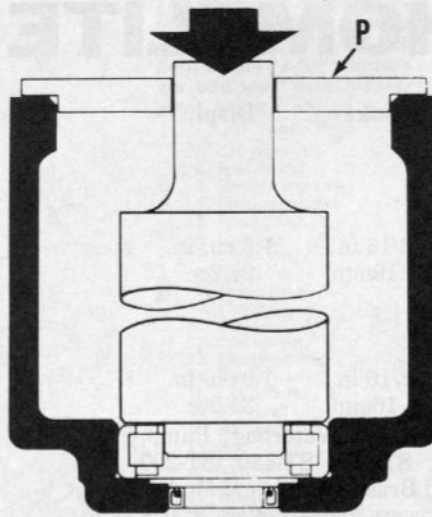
Position aligning plate (P) 24895 as shown to center bearing installation tool 24893 when installing bearing in housing.
